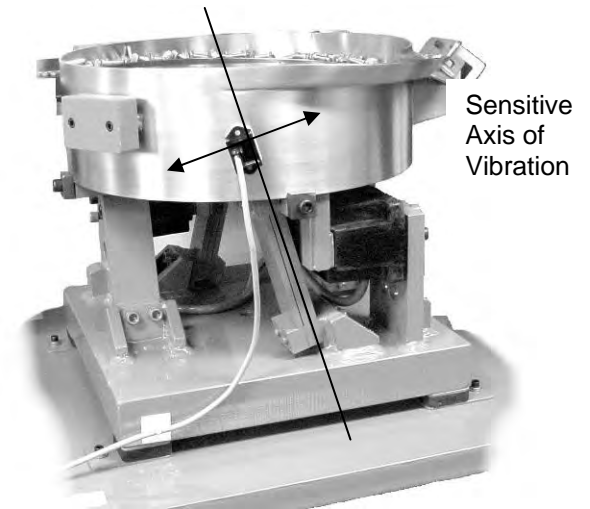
The arrow shows the direction of vibration which is at a right angle to the spring pack.
